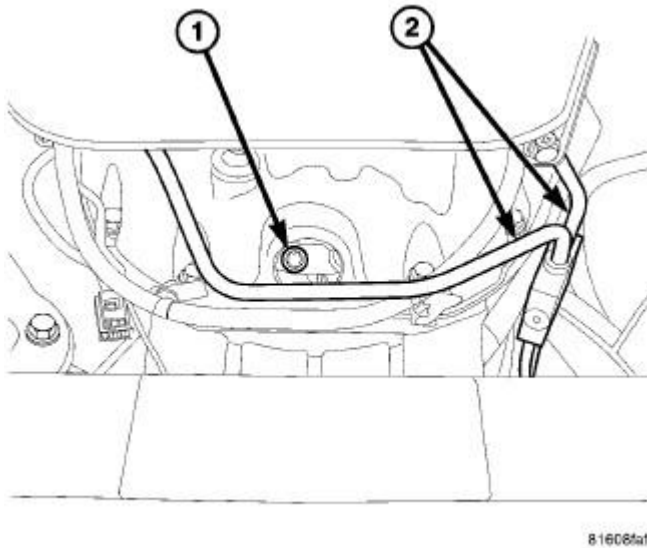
TORQUE CONVERTER TO FLEX PLATE BOLTS
